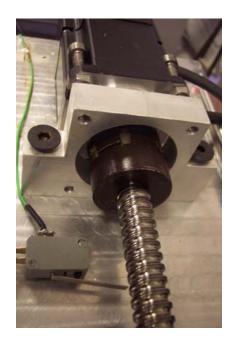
5: The servo motor maintains motion along Y axis and the ball screw attached to this motors shaft with a bearing
